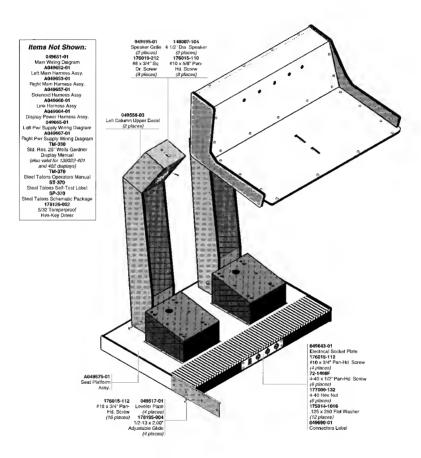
Cabinet-Mounted Assemblies, Rear View A049570-01 D
